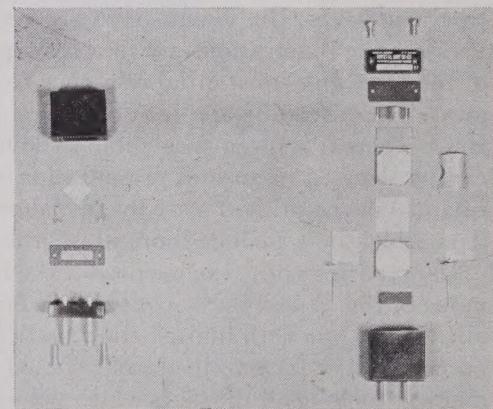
Assembly details of plated- and clamped-type quartz crystal units.
